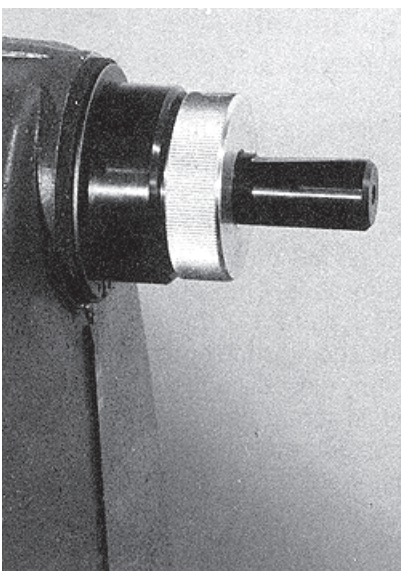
The Mark V main and auxiliary spindles have a reverse taper. The locking setscrew of all spindle-mounted accessories must seat securely against the flat.
